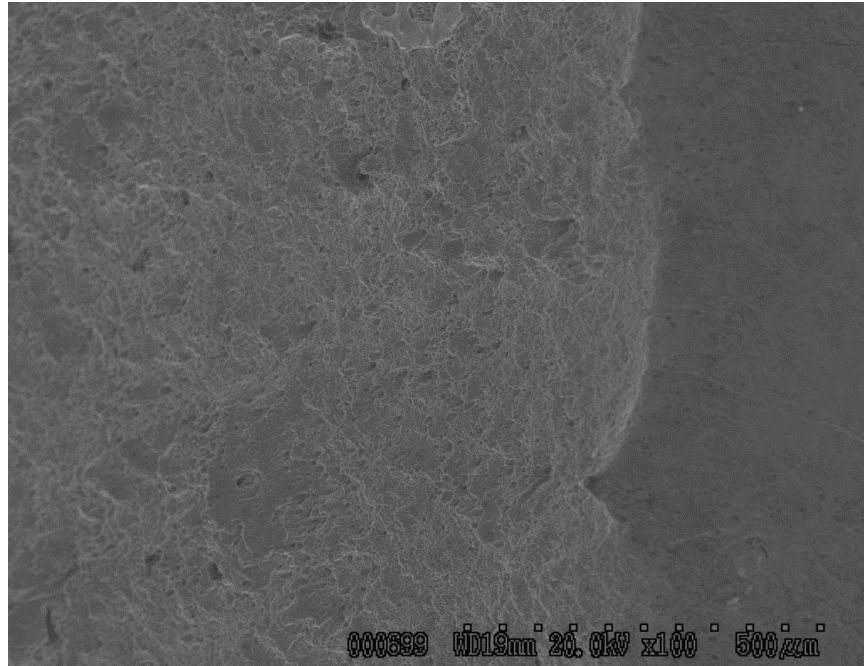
Scanning electron microscope fractograph of generator shaft fracture subsegment "B", Area 2.
